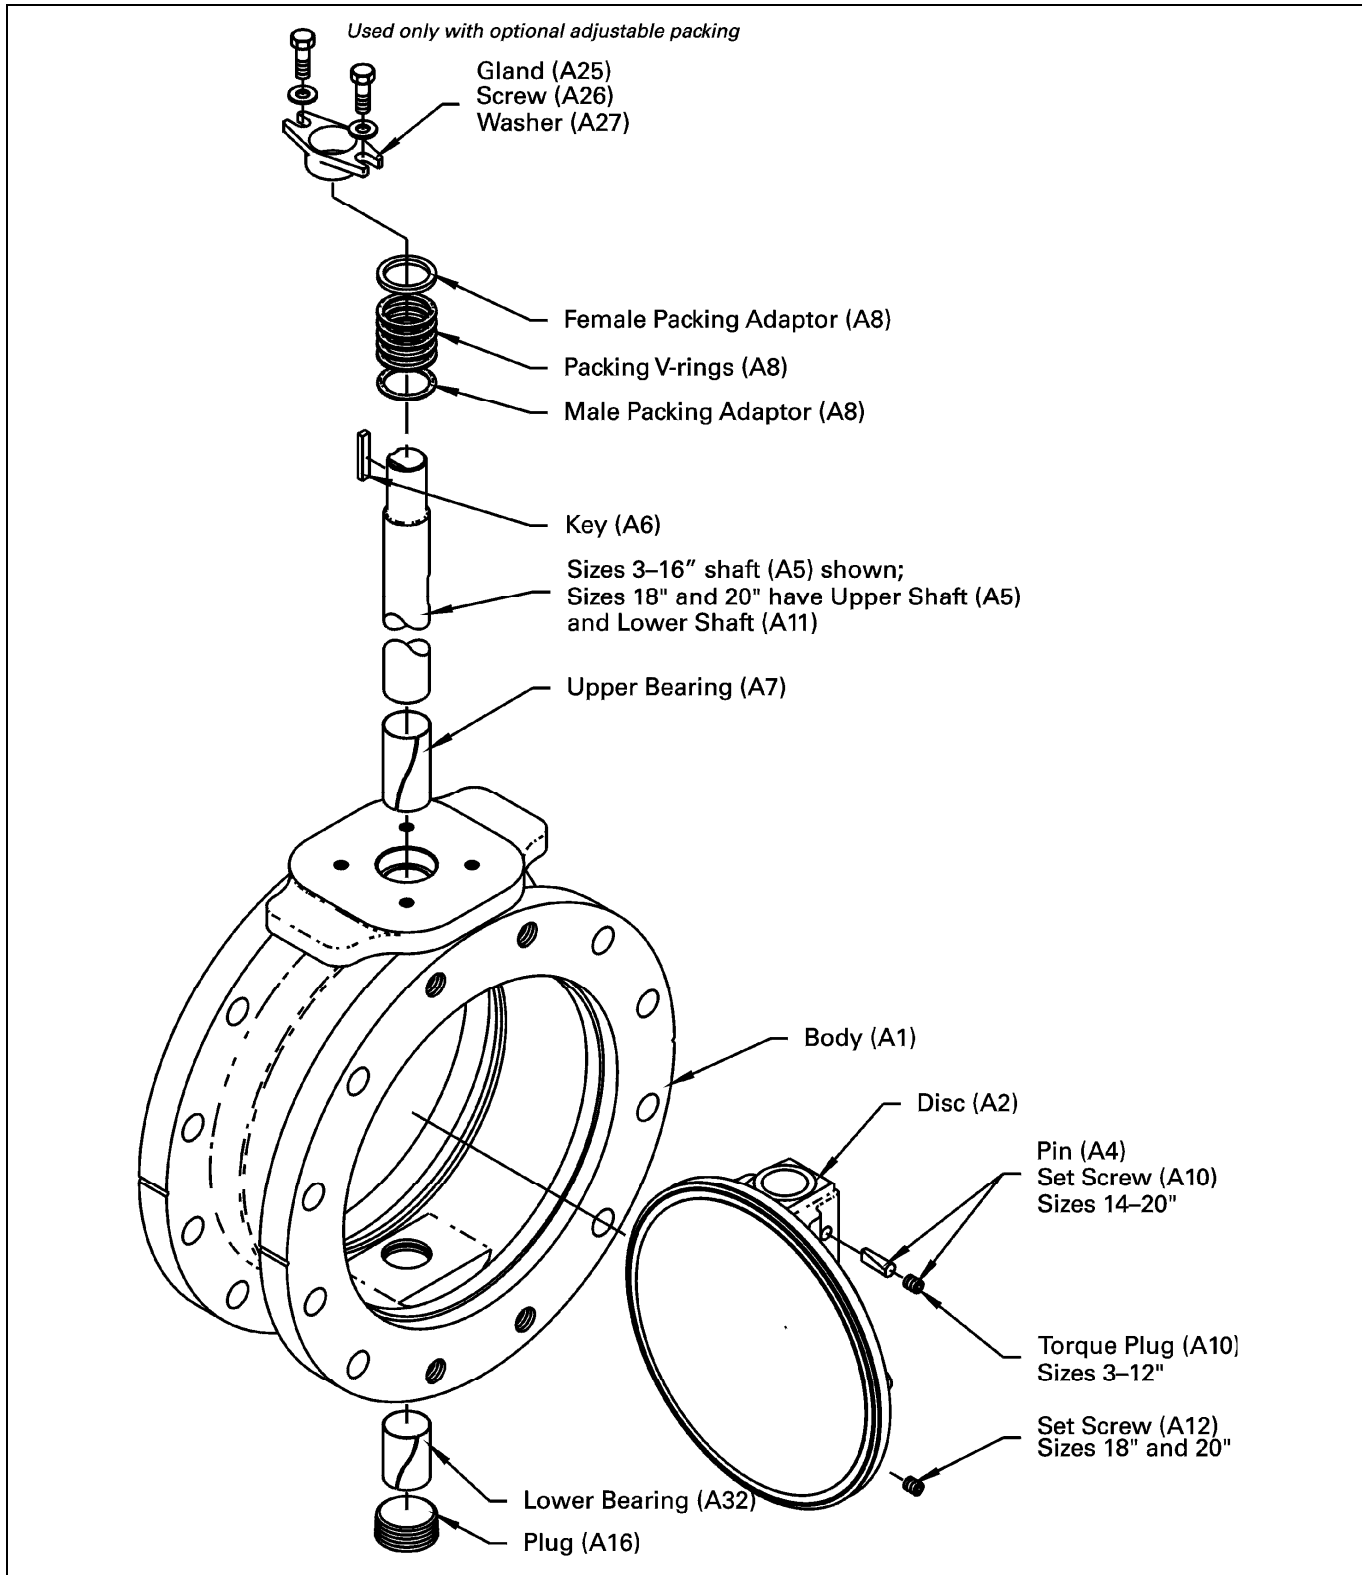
Disassembled 3-20" BAW AWWA Butterfly Valve
